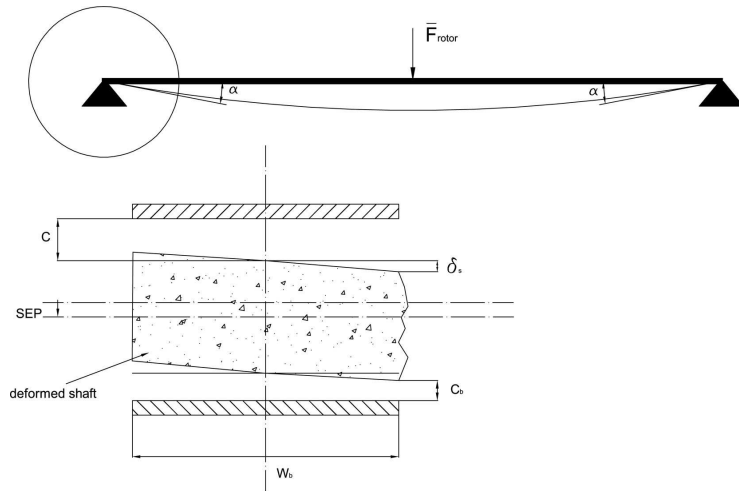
The rotor shaft deflection and the journal bearing in constraint condition 1.
